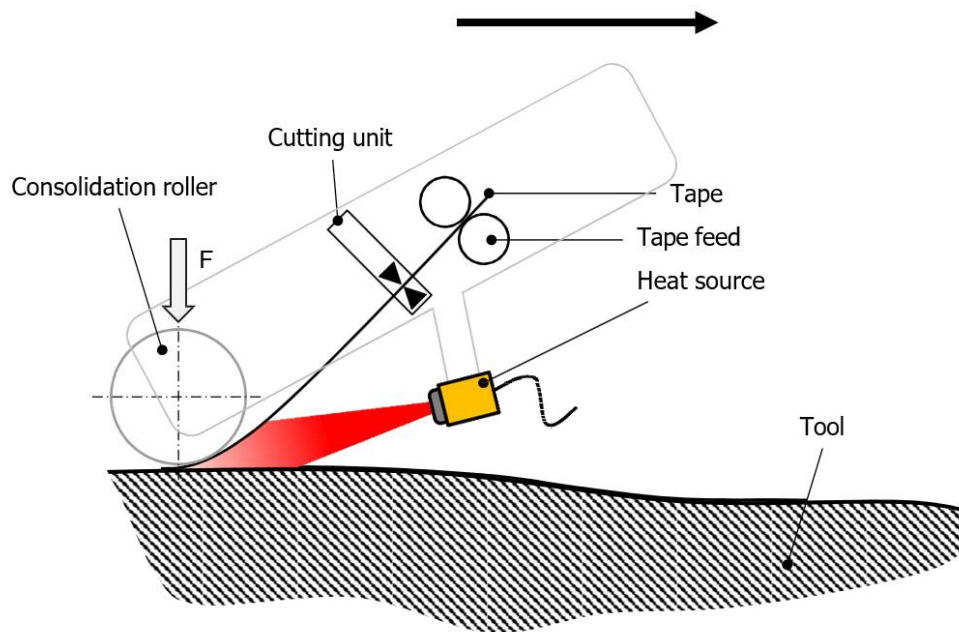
Automated fiber placement lay-up head, adapted from [35].
